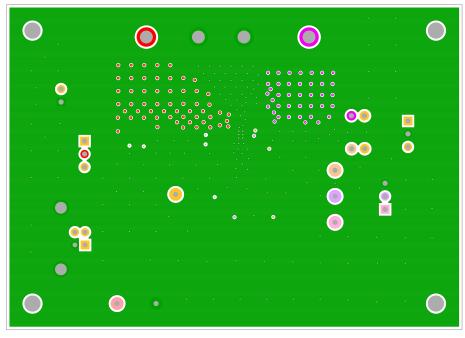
BOTTOM LAYER SOLDER SIDE
